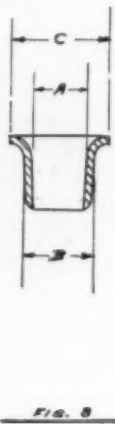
, a typical open-end insert adapted for cold molding; Fig. 4, indicates the correct ratio of length to thickness; Fig. 8, the correct section for an eyelet.
